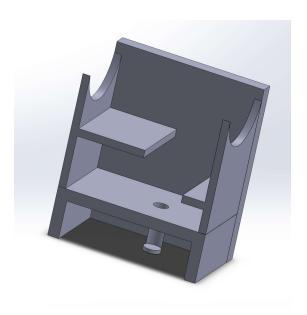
Solidworks Design of Housing Unit with Dimensions of Each Component
